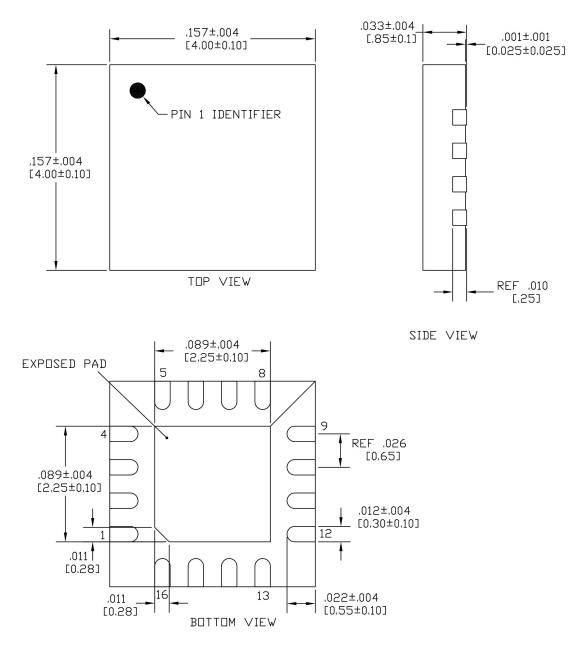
QFN4X4-16 Plastic Package Dimensions (all dimensions in inches [millimeters])
